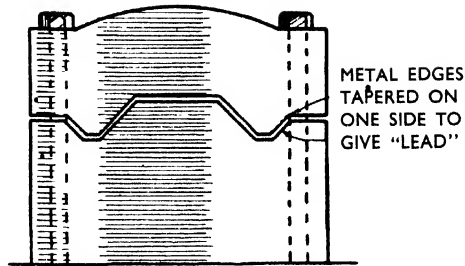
DIE FOR FORMING AIRCRAFT CHANNEL SECTIONS ON A DRAW-BENCH
